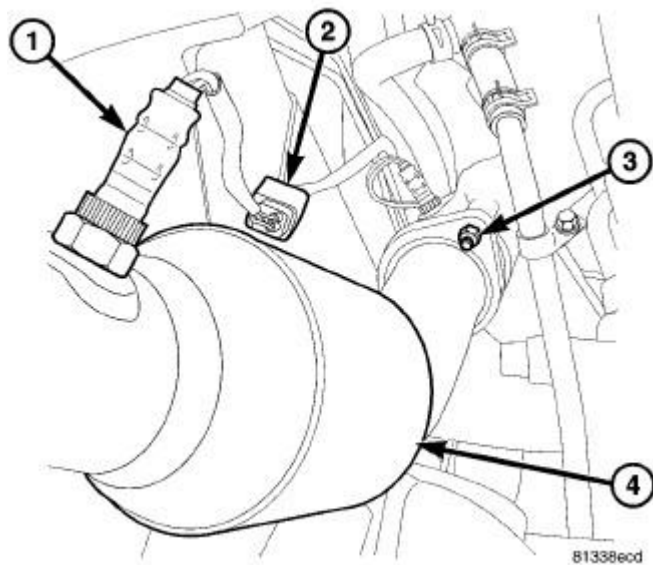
Oxygen Sensor, Oxygen Sensor Connector, Ball Flange Nut & LH Catalytic Converter
